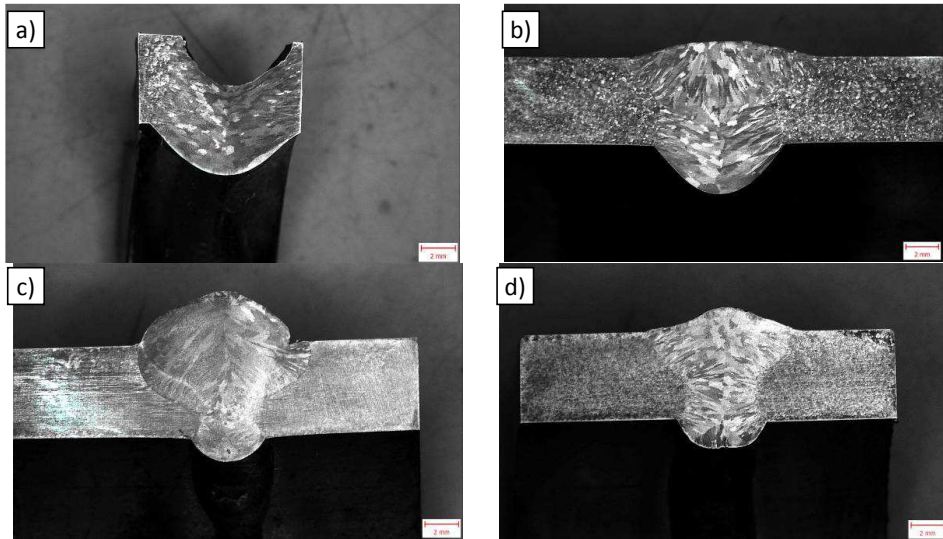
Macrostructure of the joints of a tube made of DMV 617 mod ally, made with: a) disc laser, beam power according to Fig. 7, b) joint penetration - disc laser, filling and face - TIG, c) joint penetration - disc laser, filling and face - hybrid (laser + MAG), d) with one run with the hybrid method (laser + MAG)
